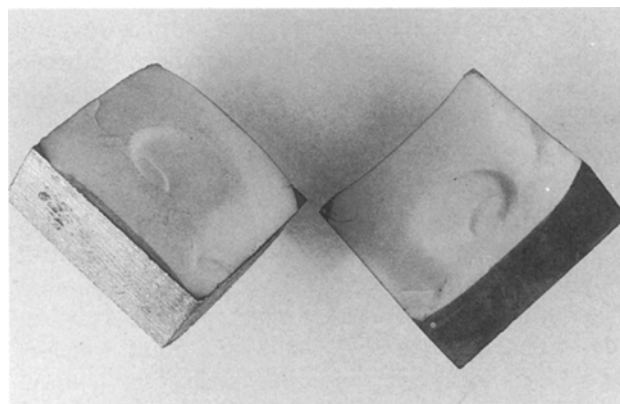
Breakage of an Al–Al₂O₃ weld caused by high speed cooling of the specimen.
